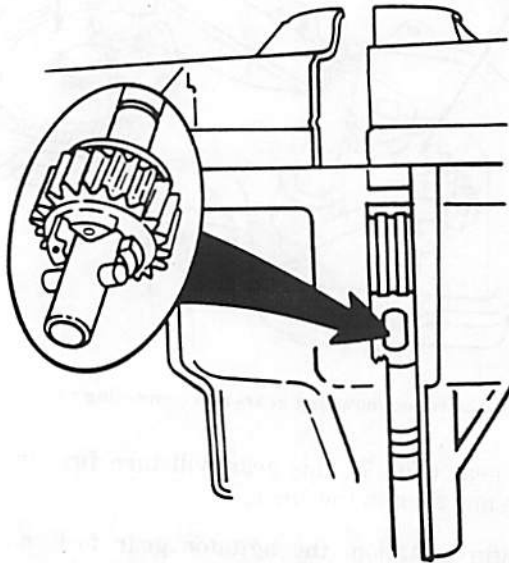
Agitator gear engaged with agitator drive shaft pin.
